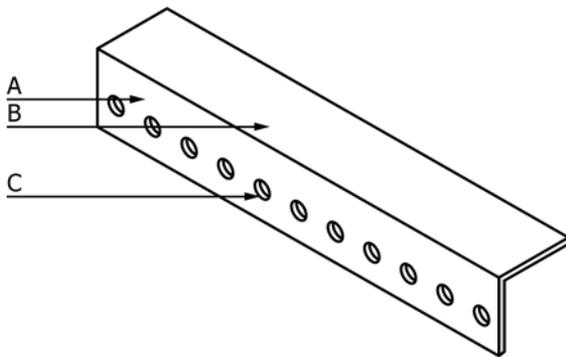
Part 1, Placement of Specimen for Torquing
